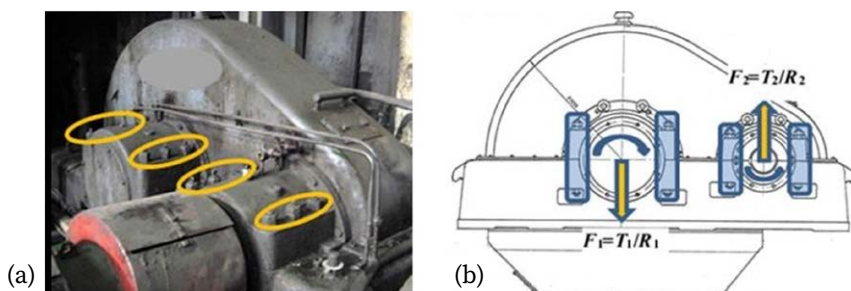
Industrial heavy-duty gearbox: (a) bolt studs joints;
